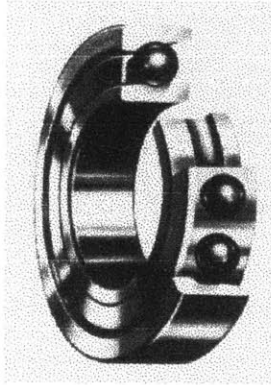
Angular contact ball bearing. Source: NSK-RHP
